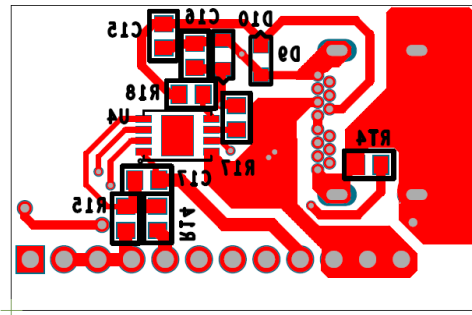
Printed Circuit Layout, Daughter Board, Bottom.
